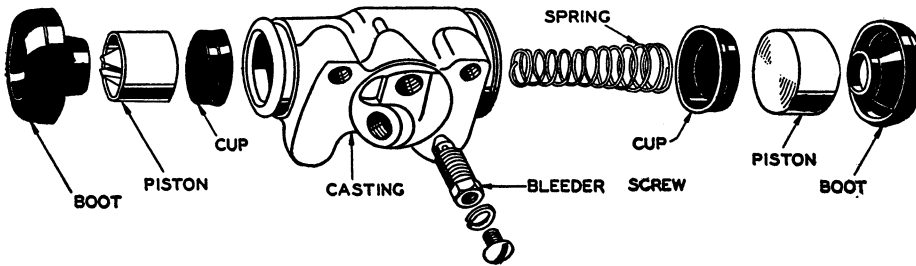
Exploded view of wheel cylinder with rubber end covers or boots
